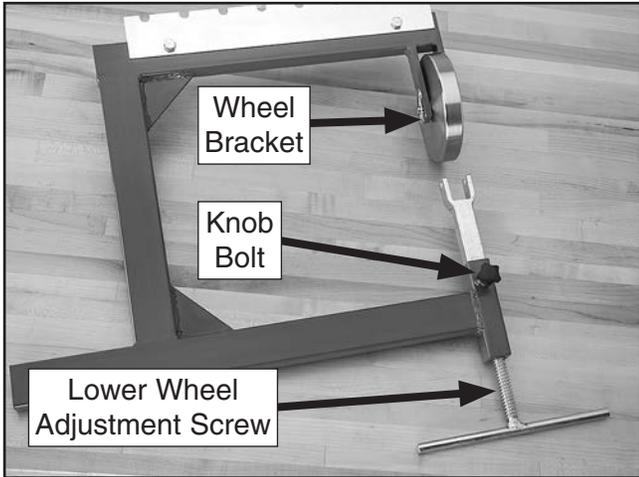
Lower wheel adjustment screw and knob bolt installed.
